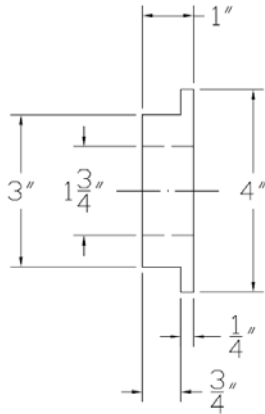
Big Insert for 7/8" and 1" Bolts
